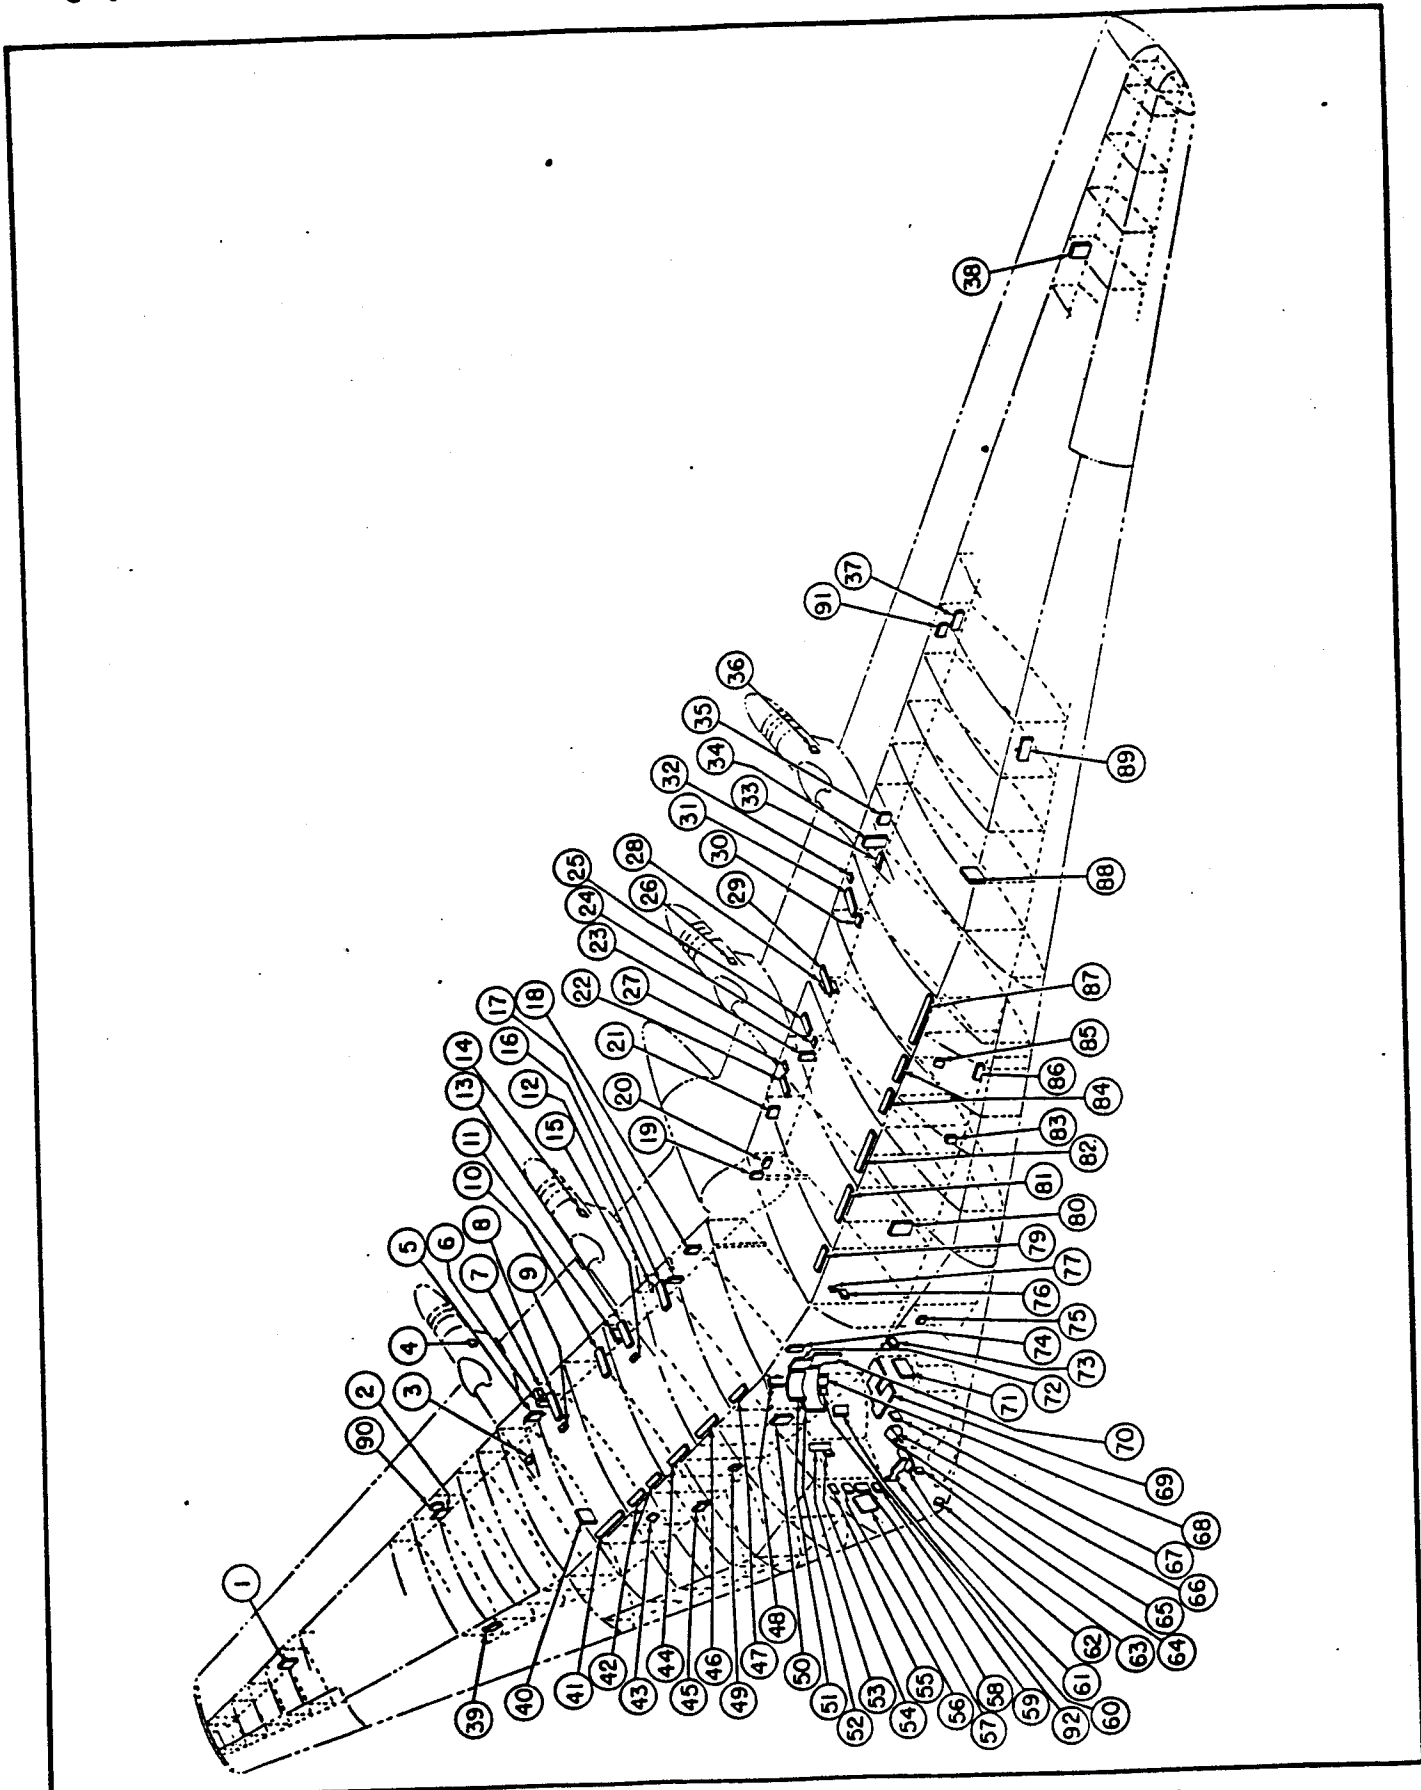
Electrical Panels - Schematic (Sheet 1 of 4 Sheets)
